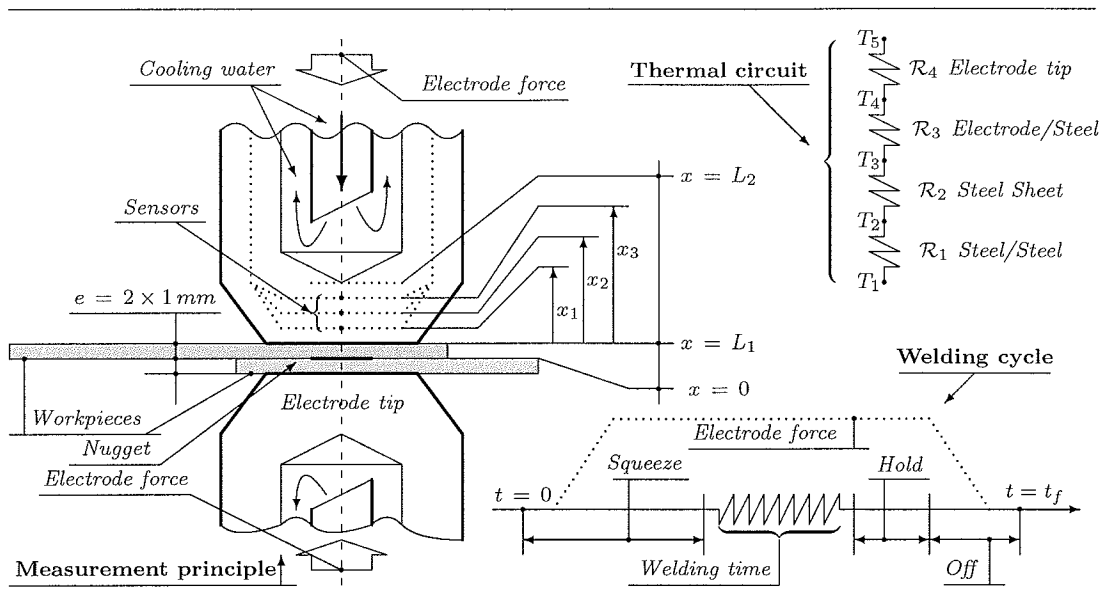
Schematic representation of resistance spot welding, thermal circuit and welding cycle.
